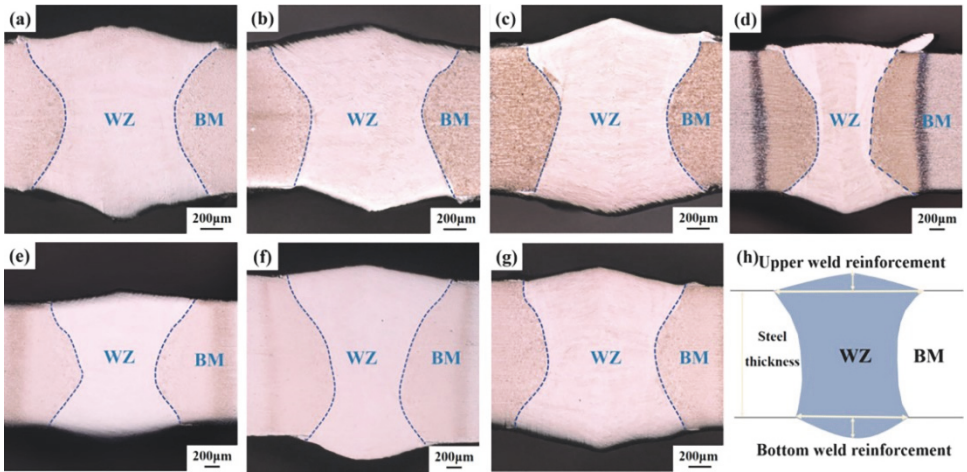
(a) Optical image of weld #1 (b) Optical image of weld #2 (c) Optical image of weld #3 (d) Optical image of weld #4 (e) Optical image of weld #5 (f) Optical image of weld #6 (g) Optical image of weld #7 (h) Schematic diagram of weld reinforcement.
